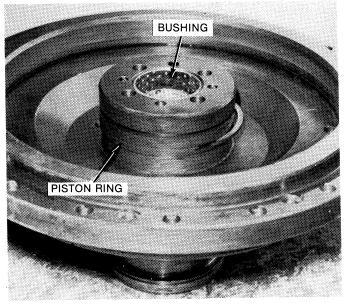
Front Side of Clutch Cylinder with Piston Removed.
